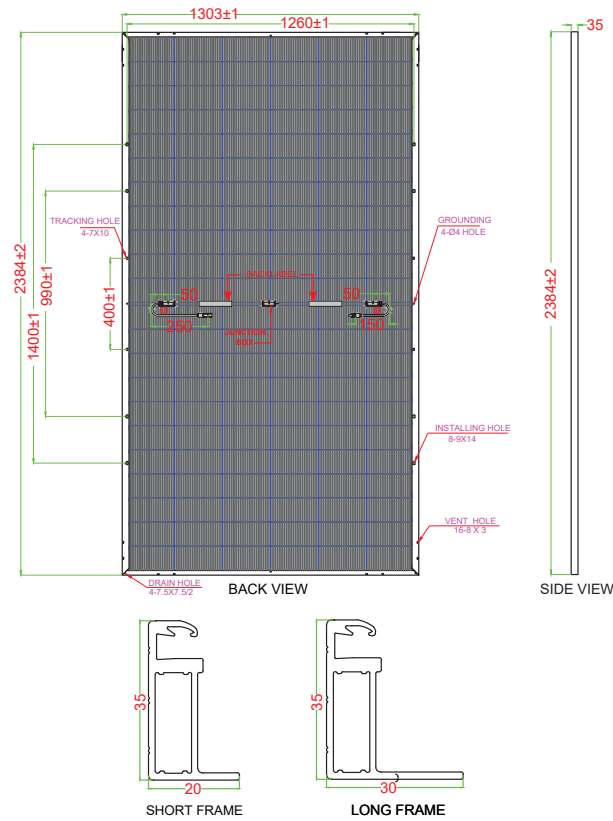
Mechanical Drawing of PV module SURYAVA VSM DH.66.AAA.05
